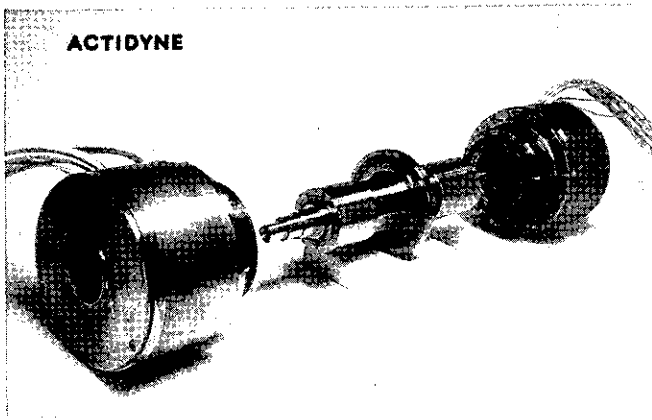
Magnetic bearings cartridges and shaft of a turbo expander (Photo S2M)
